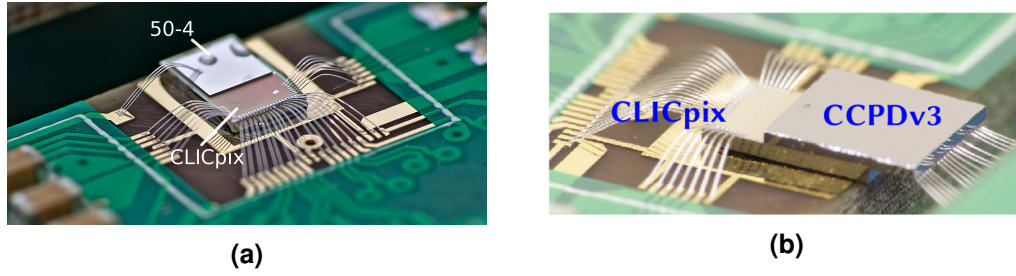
A close up of a (a) planar sensor assembly and (b) a capacitively coupled assembly, showing the wire bonds on both sides and the carrier boards.
